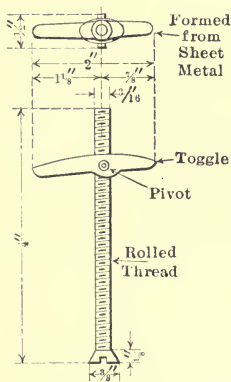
TOGGLE BOLT FOR METAL MOLDING.
